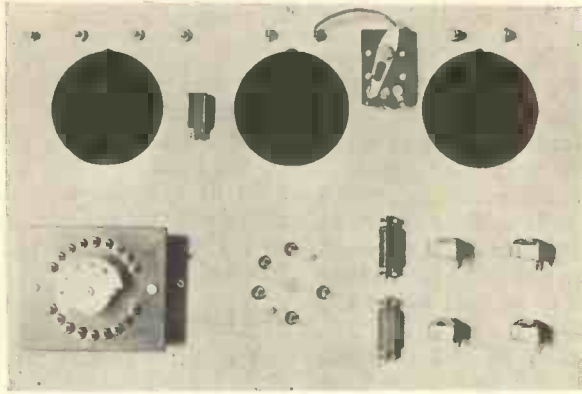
THE PARTLY ASSEMBLED PANEL.
